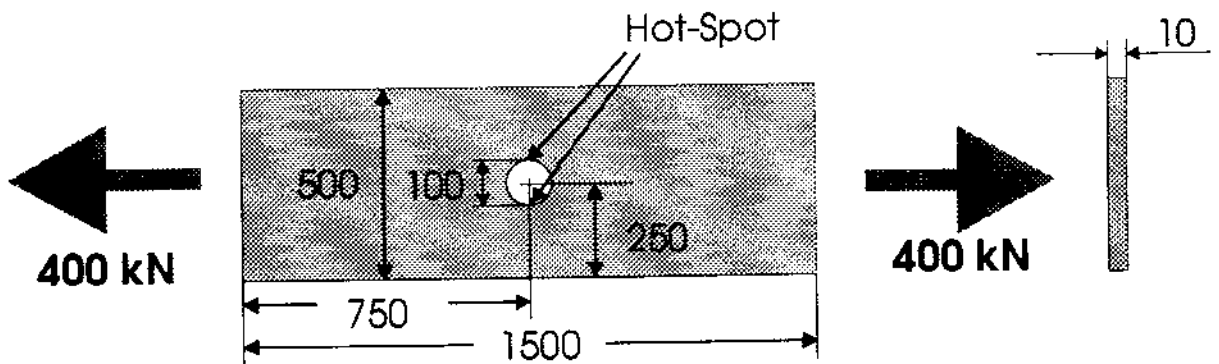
Geometry and Dimensions for Plate with Transverse Hole
